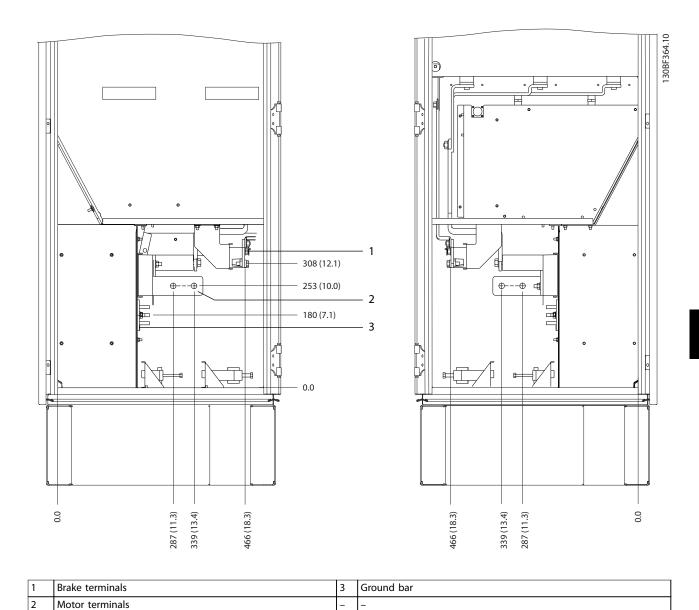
Terminal Dimensions for F12–F13 Inverter Cabinet, Side View
